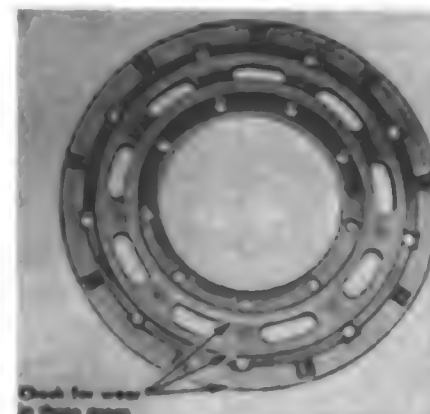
Inspect brass bearing plates for wear or scoring in the areas shown.
